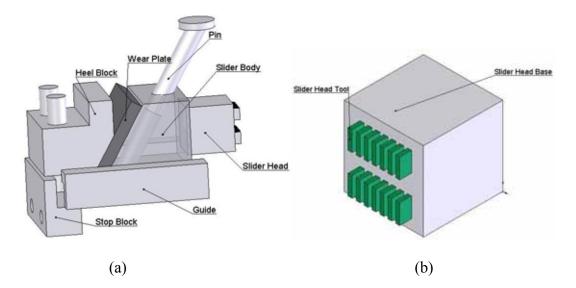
The assembly of a typical type of slider and the slider head portion
